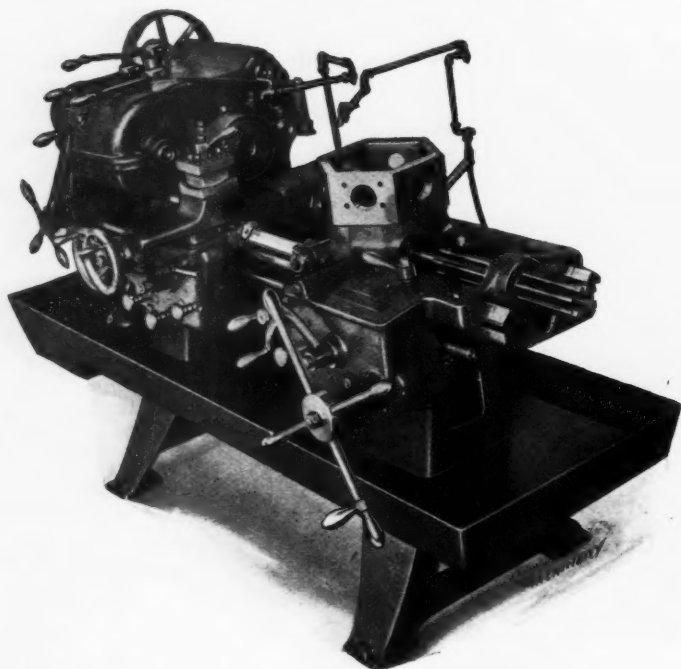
Foster Type I-B Universal Turret Lathe with Two Tool-carrying Units
